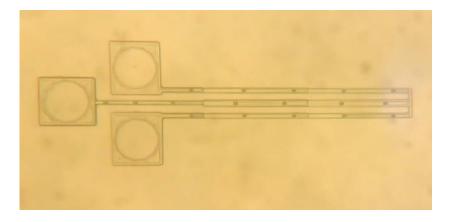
View of fabricated Electro-Thermal Actuator obtained by 3D printer camera
